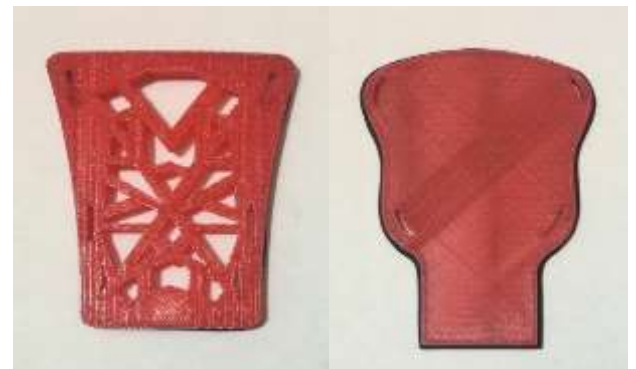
Manufacture of individual parts in PLA material with AXIOM printer
